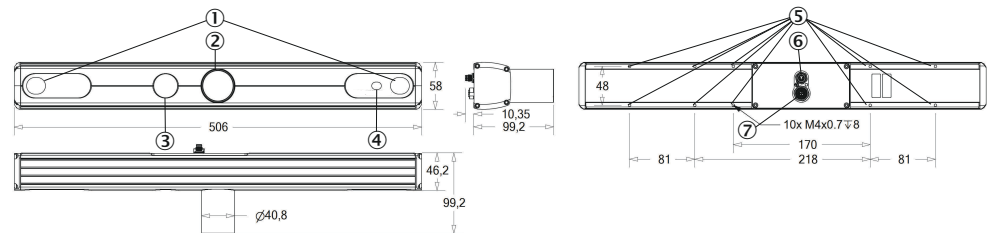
Ensensio C57 (PLB521) camera dimensional drawing (not true-to-scale)
